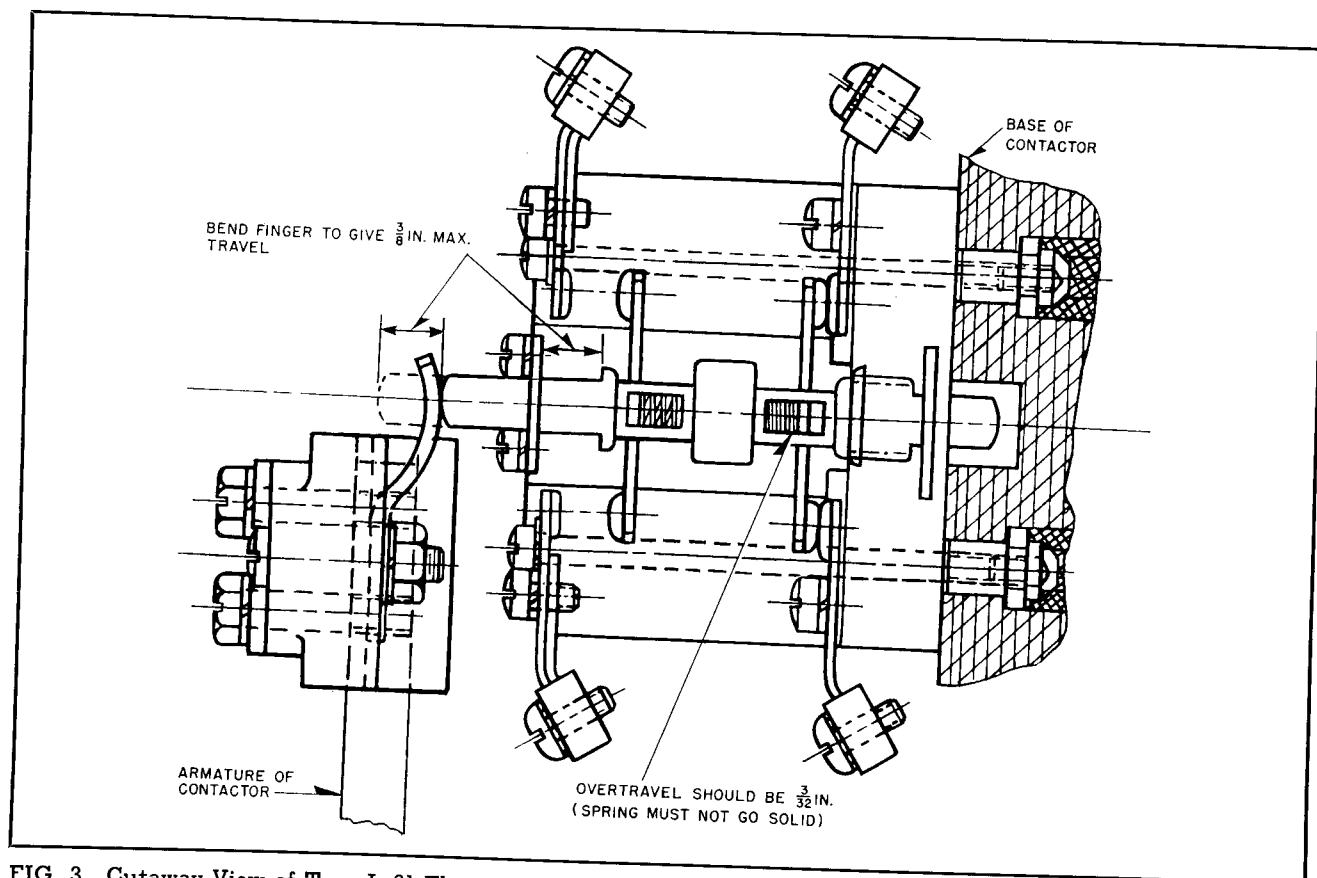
Cutaway View of Type L-61 Electrical Interlock for Spring-Closed Contactors M-301, M-401, M-501, M-601, M-701 and Magnet-Closed Contactors M-310, M-410, M-510, M-610, M-710
